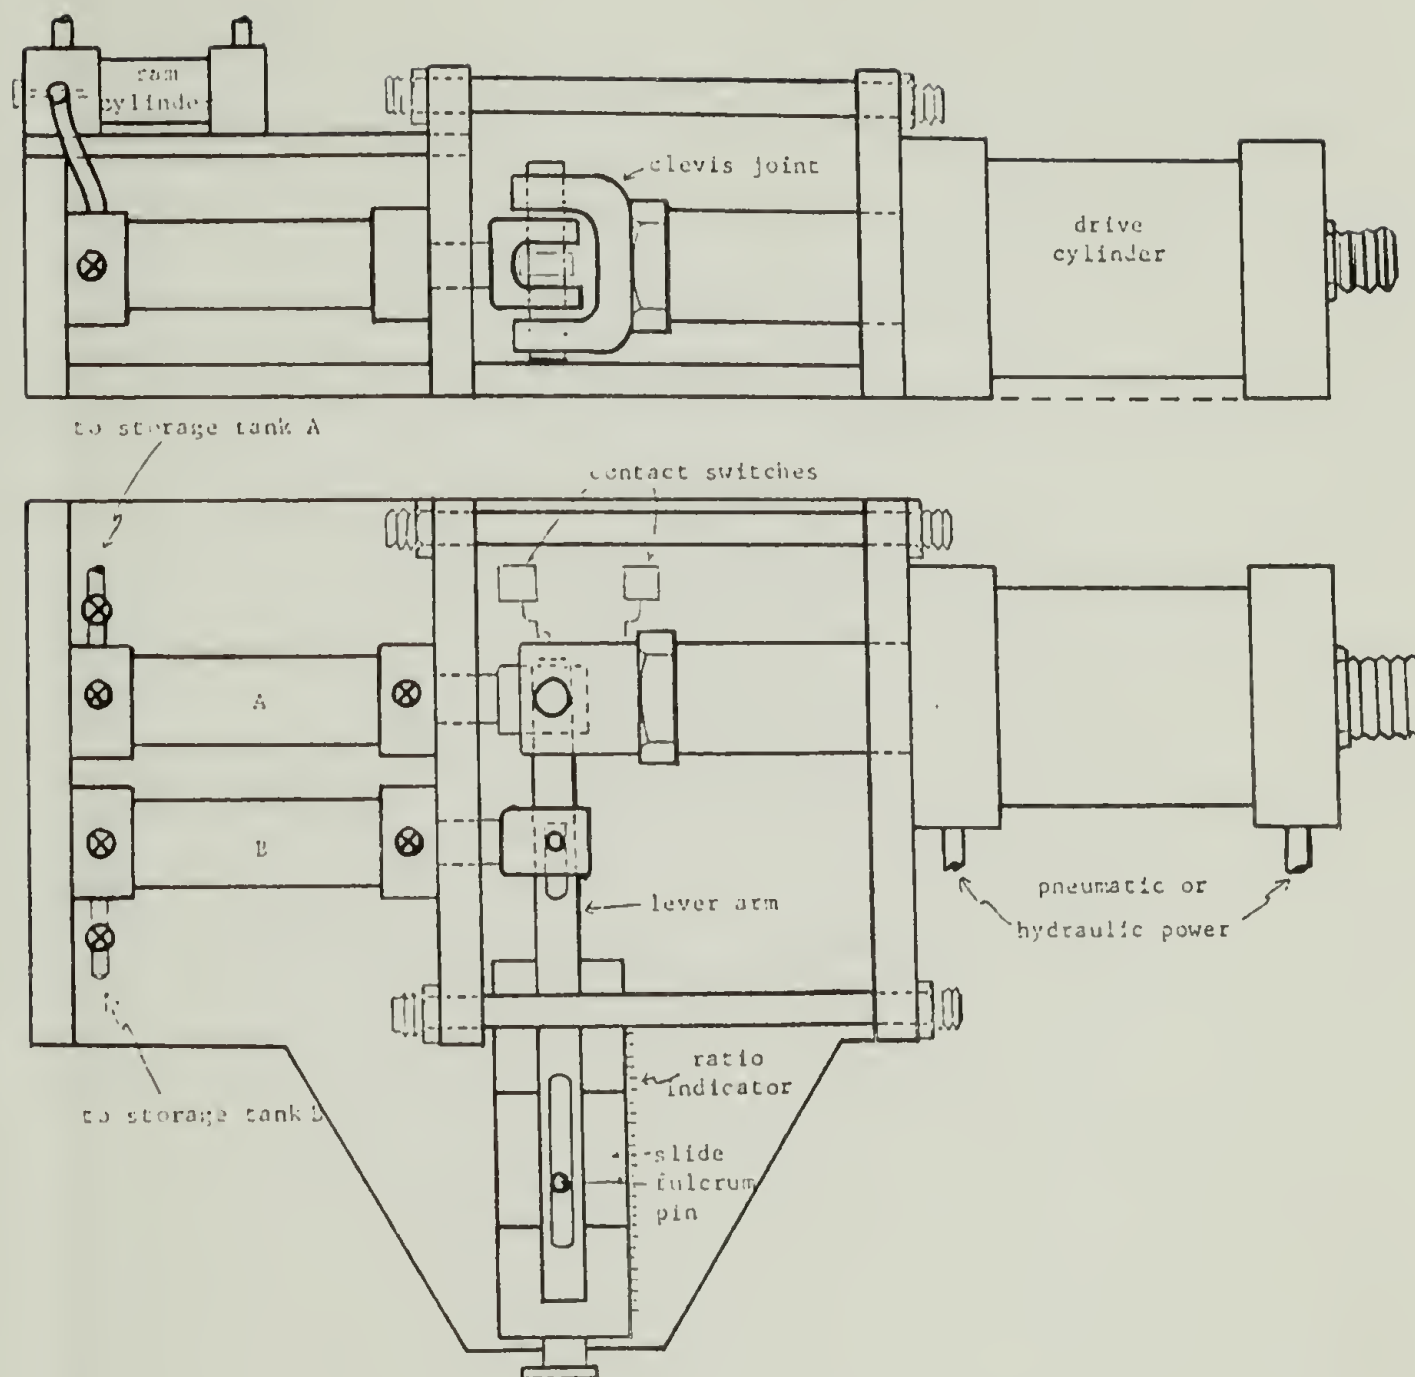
Schematic diagram of a laboratory size RIM machine (Lee⁶¹). Side and top view showing the lever arm metering system.
